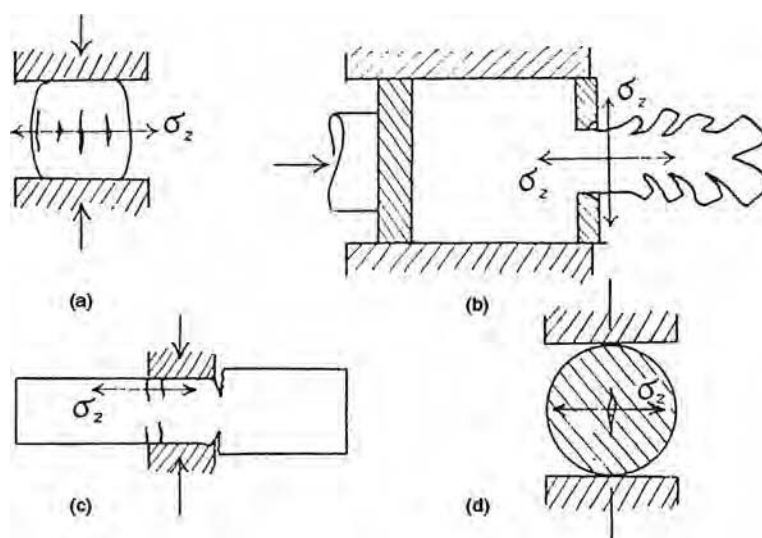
Sketches of processing defects form a basis for early models. (a) Forging or compression test specimen. (b) Extrusion. (c) Drawing. (d) Forging with no horizontal constraint at die surface Source: Ref 1
